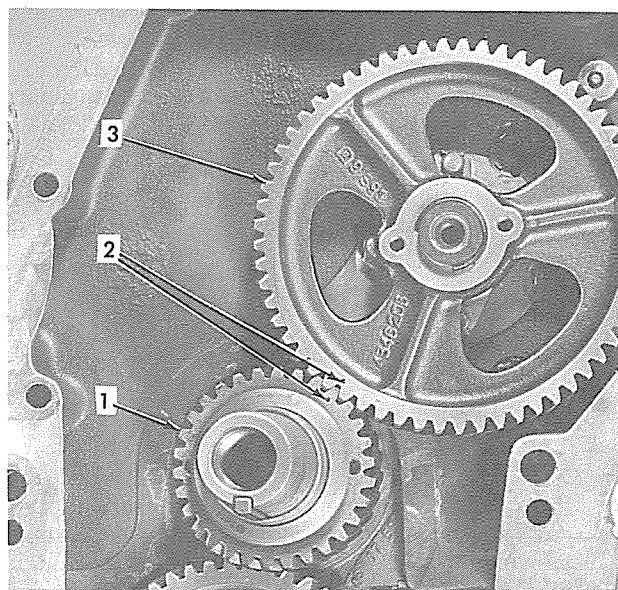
Typical Camshaft Gear and Crankshaft Gear Timing Marks Aligned
